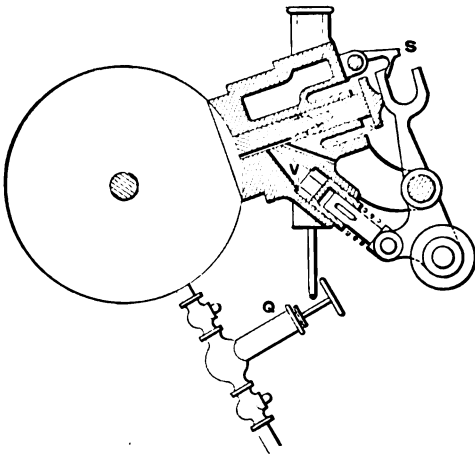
DETAIL OF STARTING GEAR FOR LARGE ROLLASON ENGINES.
